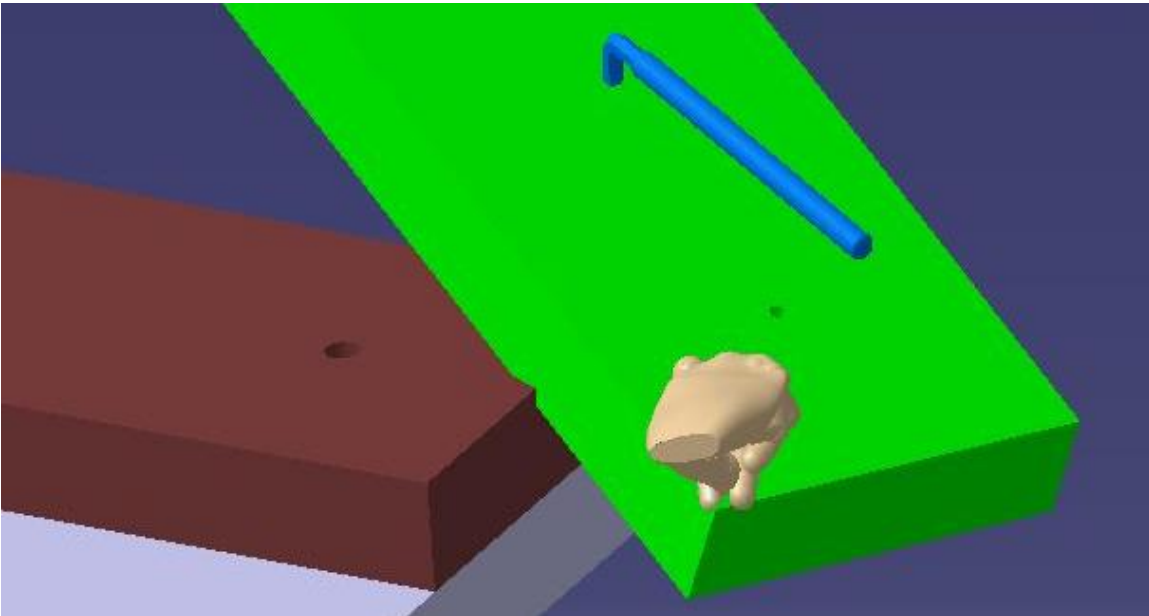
shows the fastener being removed after it is completely out of the hole. The user can now try to disassemble the components held down by this fastener.
